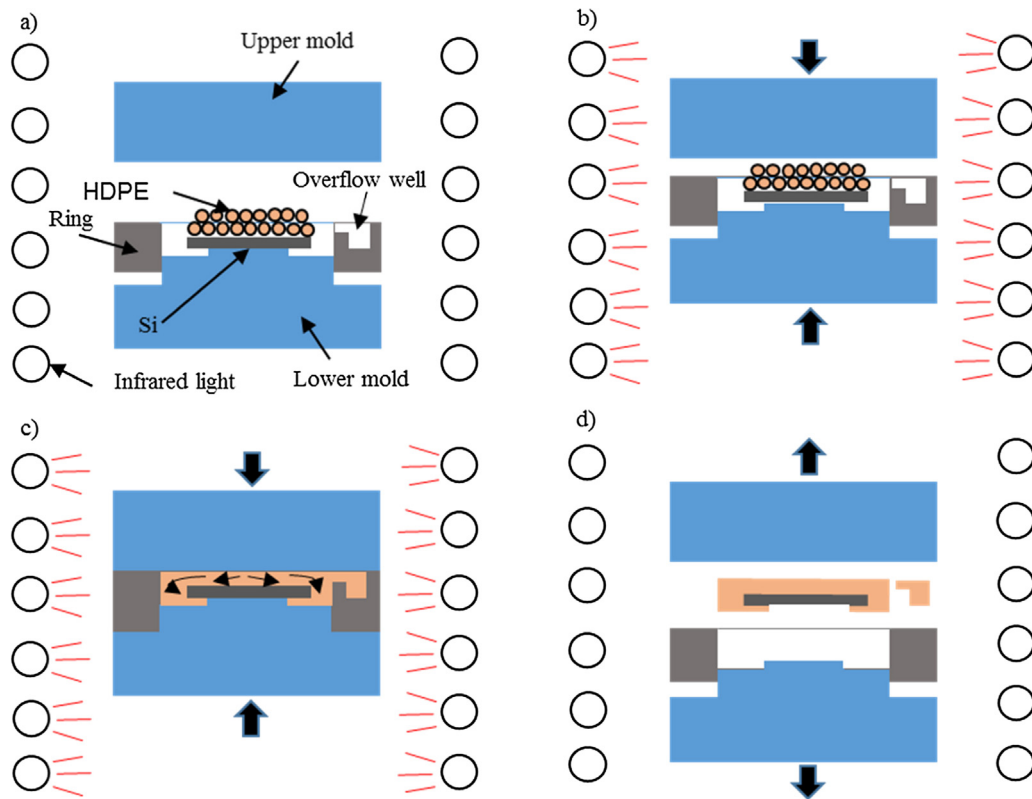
Schematic diagram of press molding process: (a) material setup, (b) heating, (c) pressing, and (d) cooling and specimen removal.
